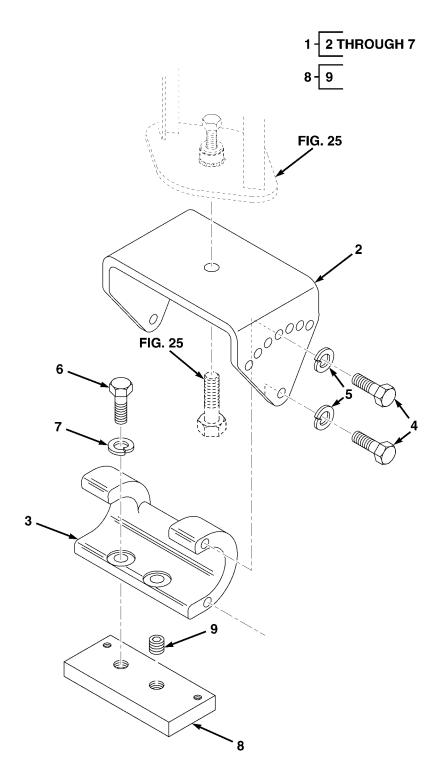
CONNECTOR HOLDER ASSEMBLY
